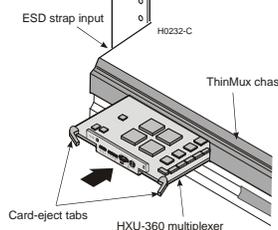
Installing an HXU-360 Card (ThinMux Chassis Shown)
